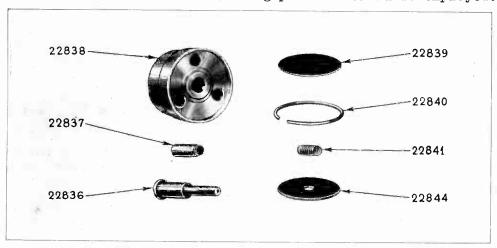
SOUND TAKE-OFF DRUM ASSEMBLY.
